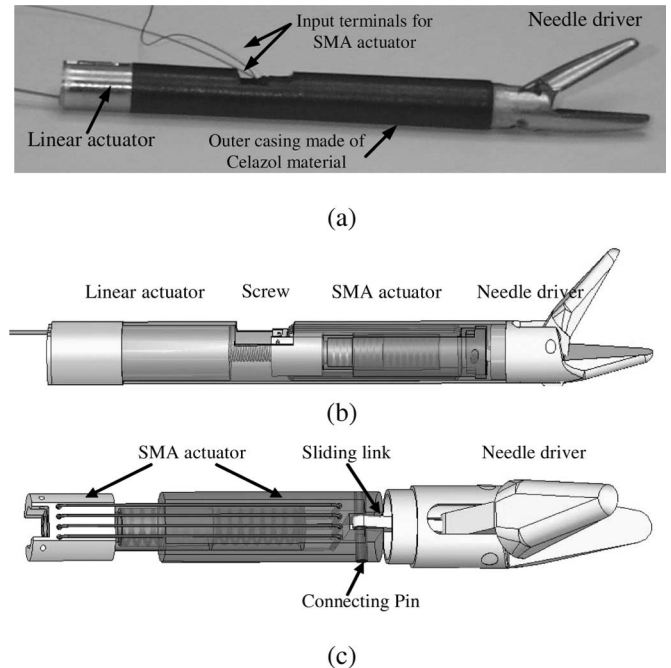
Second-generation design prototype. (a) Photograph of the prototype. (b) CAD model of the design. (c) CAD model of the assembly of SMA actuator and the needle driver.
